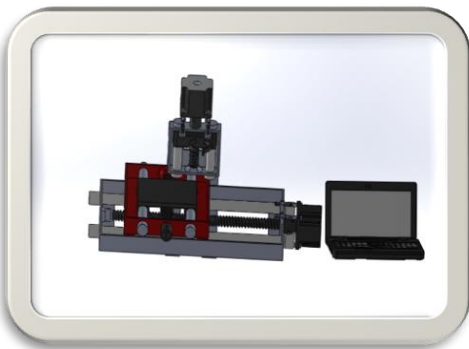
Design of a semi-automated friction stir welding machine.
